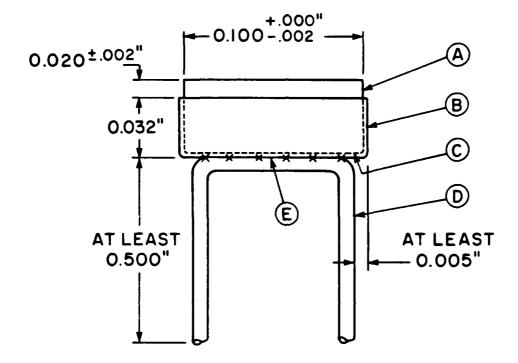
LaB₆(310) test cathode with integral heater. A: LaB₆(310) button; B: Re cup, 0.100 diam. × .030 deep, approx. .002 wall thickness; C: Braze; D: Re heater wire. diam. chosen so cathode can attain 1800 K minimum; E: spot welds. Dimensions in inches.
